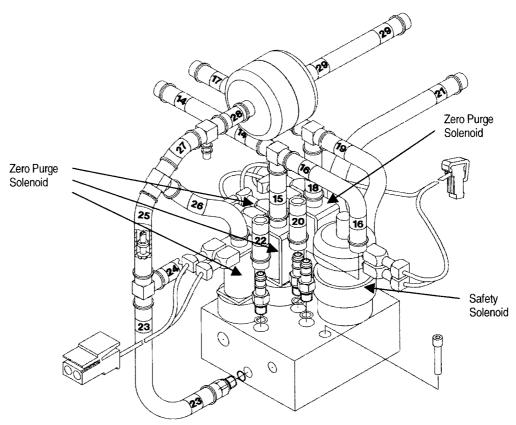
Safety Solenoid/Zero Purge Assembly
